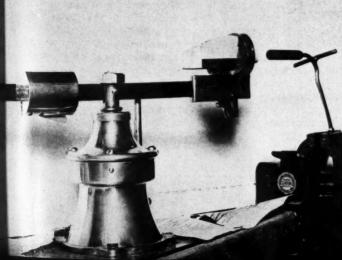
Slightly altered casting machine (63/64 inch hole drilled in back plate directly opposite and in line with hole in crucible carriage) and blow-pipe in proper position.
